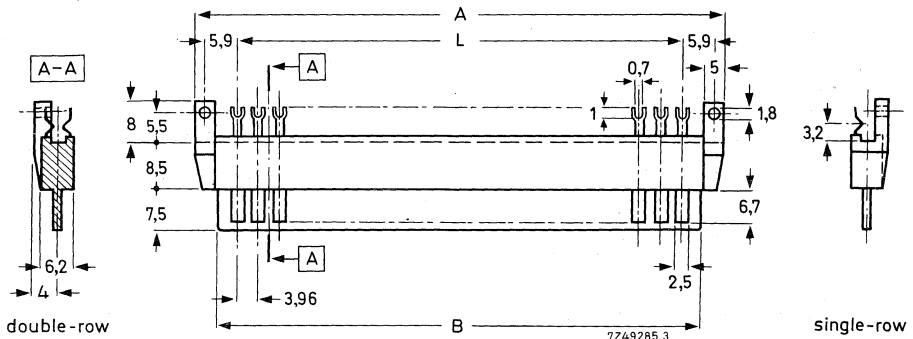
Printed-wiring interconnector; see Table 2 for dimensions A, B and L.
